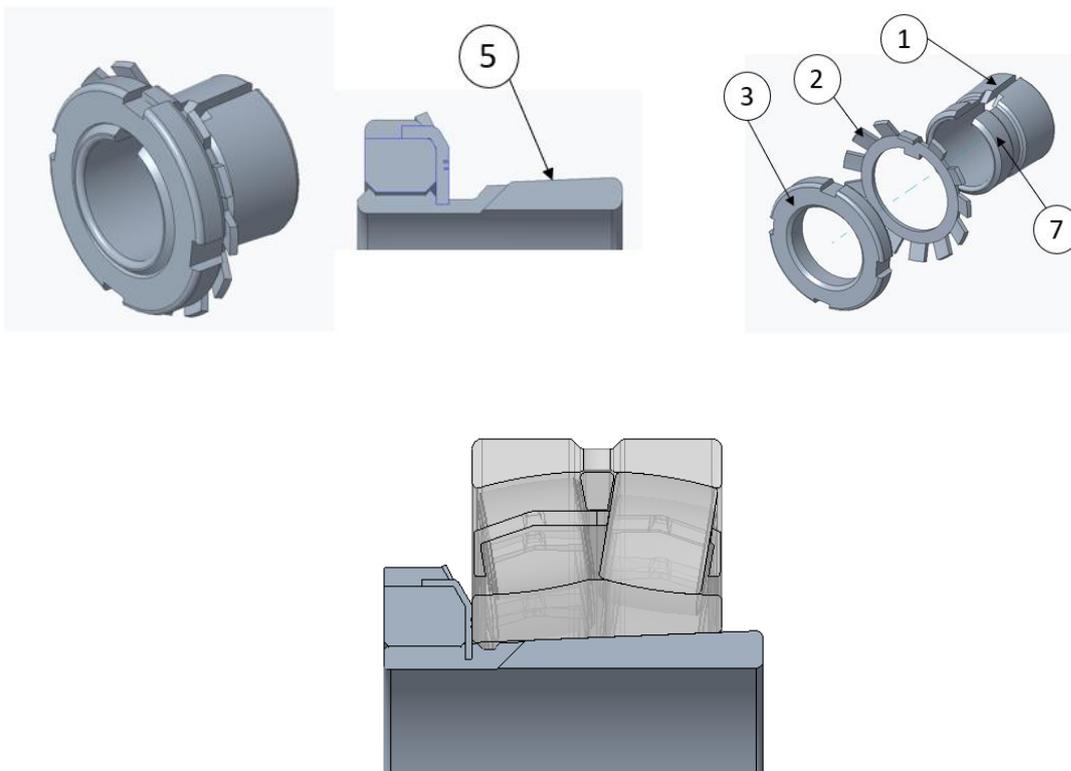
ADAPTER SLEEVE ASSEMBLY WITH LOCK NUT AND LOCK WASHER
